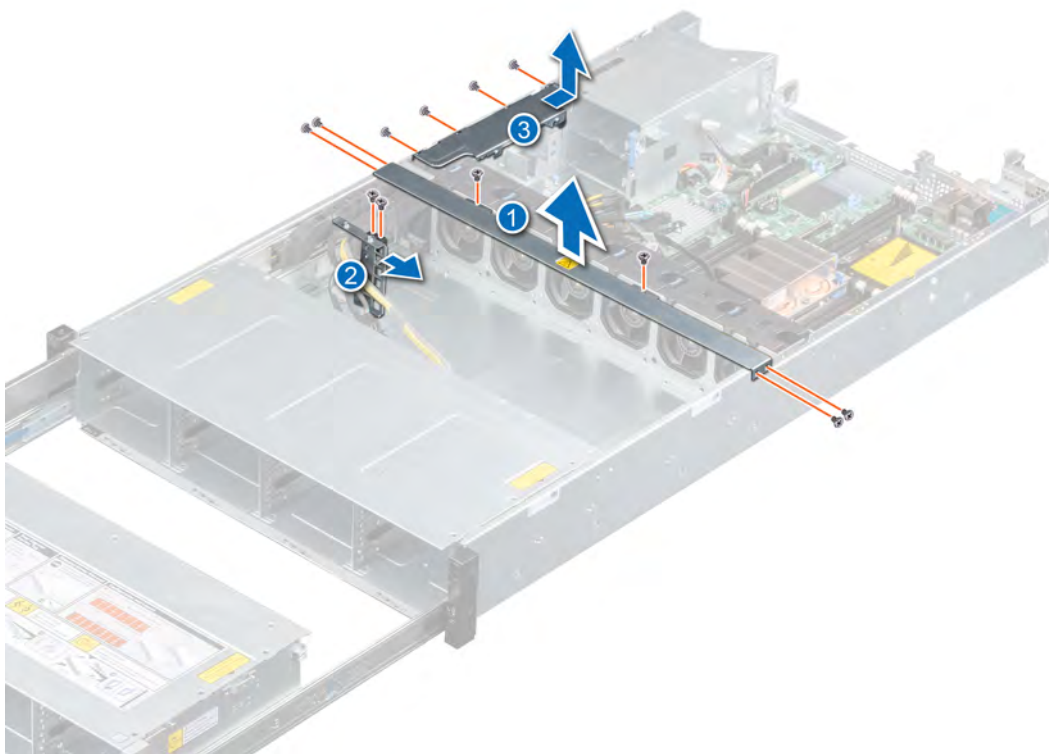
Removing the support bar, cable chain top cover and disconnecting the bay 2 backplane bracket from the cable chain assembly.
